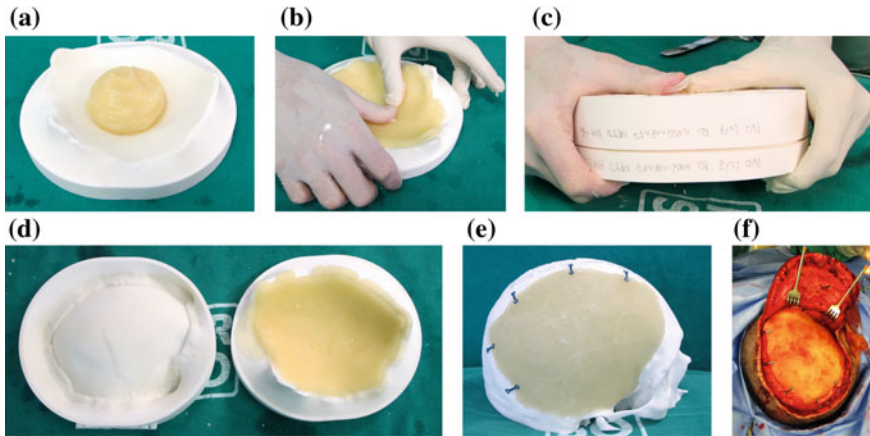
Customized cranial plates produced in PMMA a Mould produced in additive manufacturing in Polyamide 12 b Spreading the PMMA mix inside the mould c closing the mould d opening the mould to reveal the customized cranial plate after cooling down the PMMA e fitting tests in a skull biomodel, and f placing PMMA cranial plate in the patient
